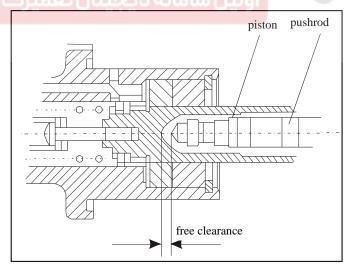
Free Clearance from Pushrod to Master Cylinder Piston
